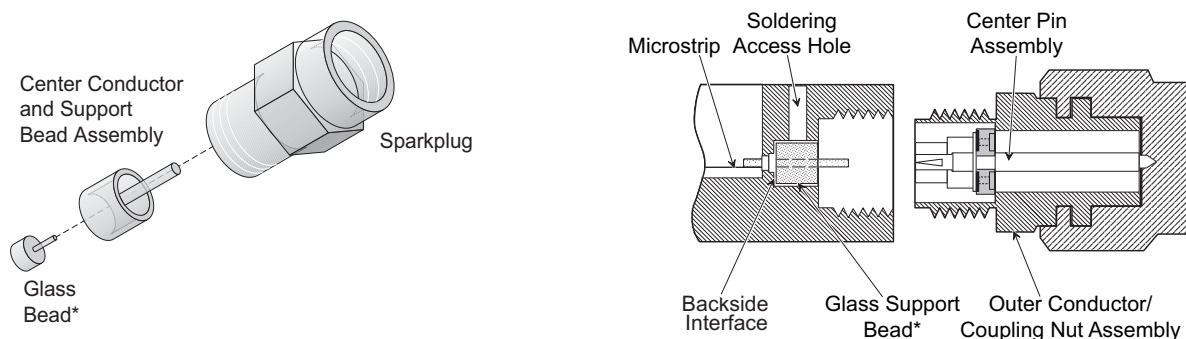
K102M-R or EK102M-R Assembly (*Glass Bead not supplied)
